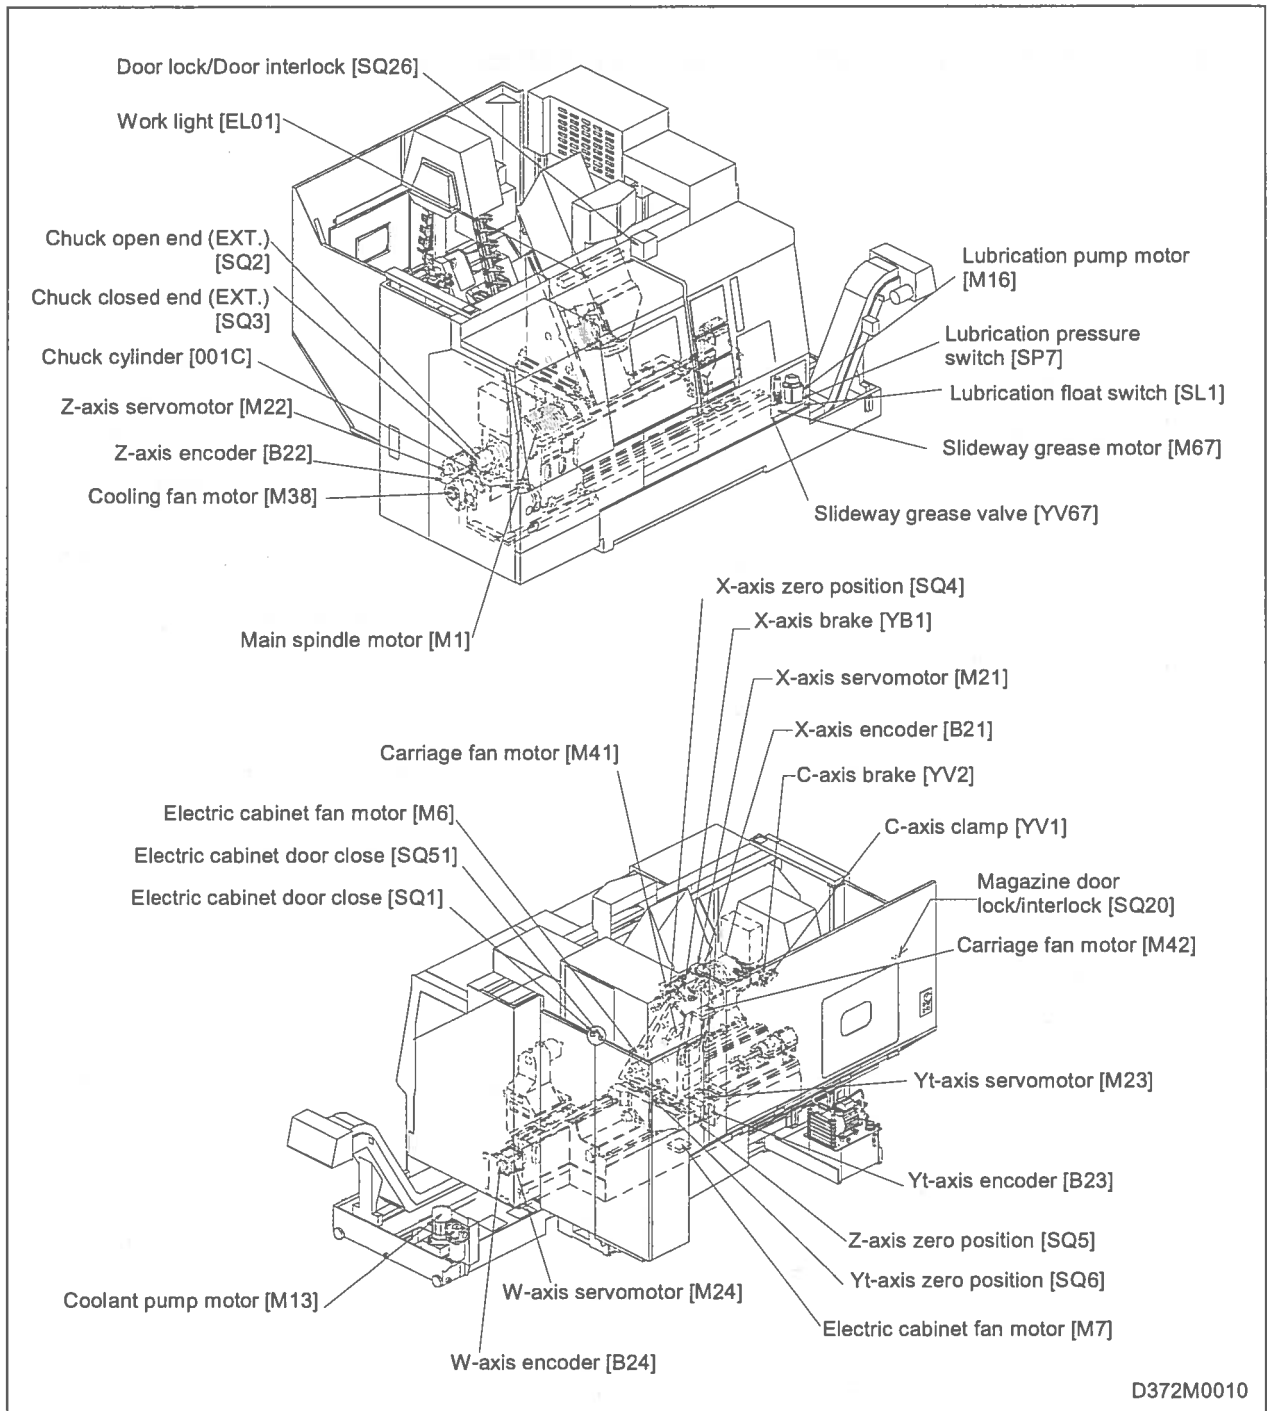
Equipment layout (INTEGREGX 100-III) [20/40-tool magazine]
